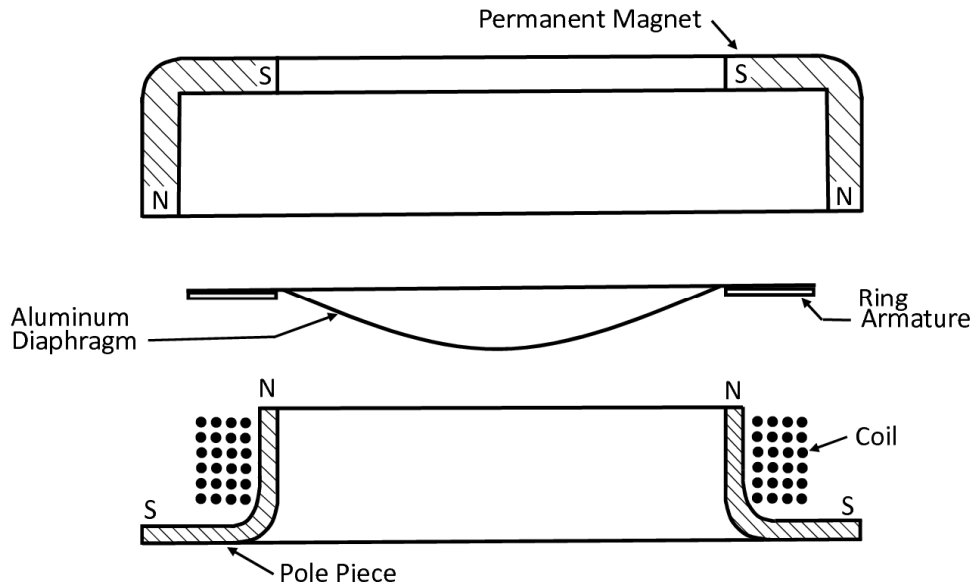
Diagram with an exploded view of a U1 receiver.
